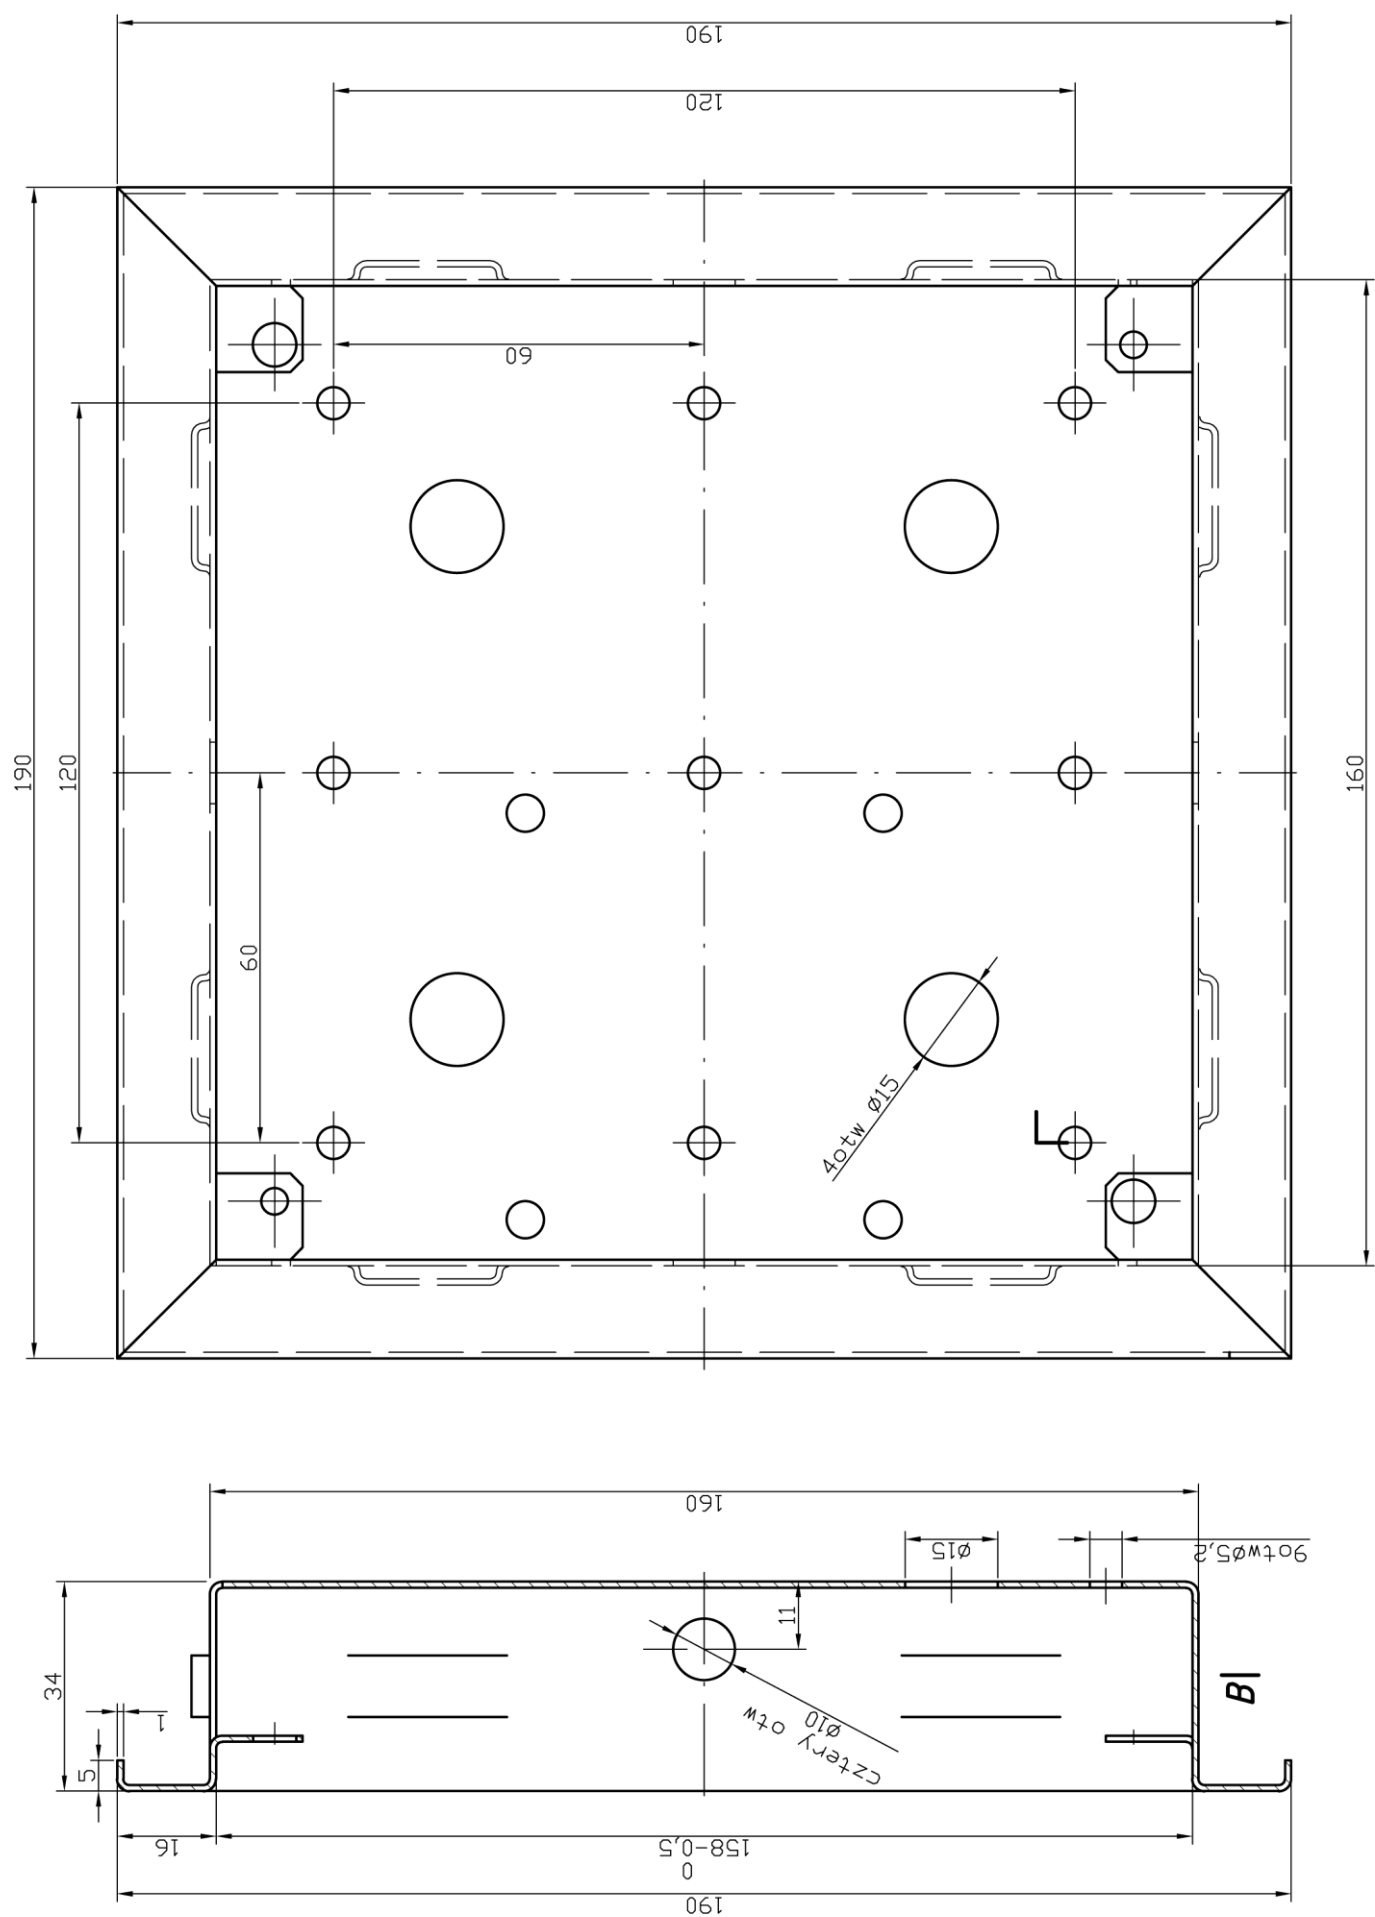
PC-2000 panel – flush-mounted frame dimensions
